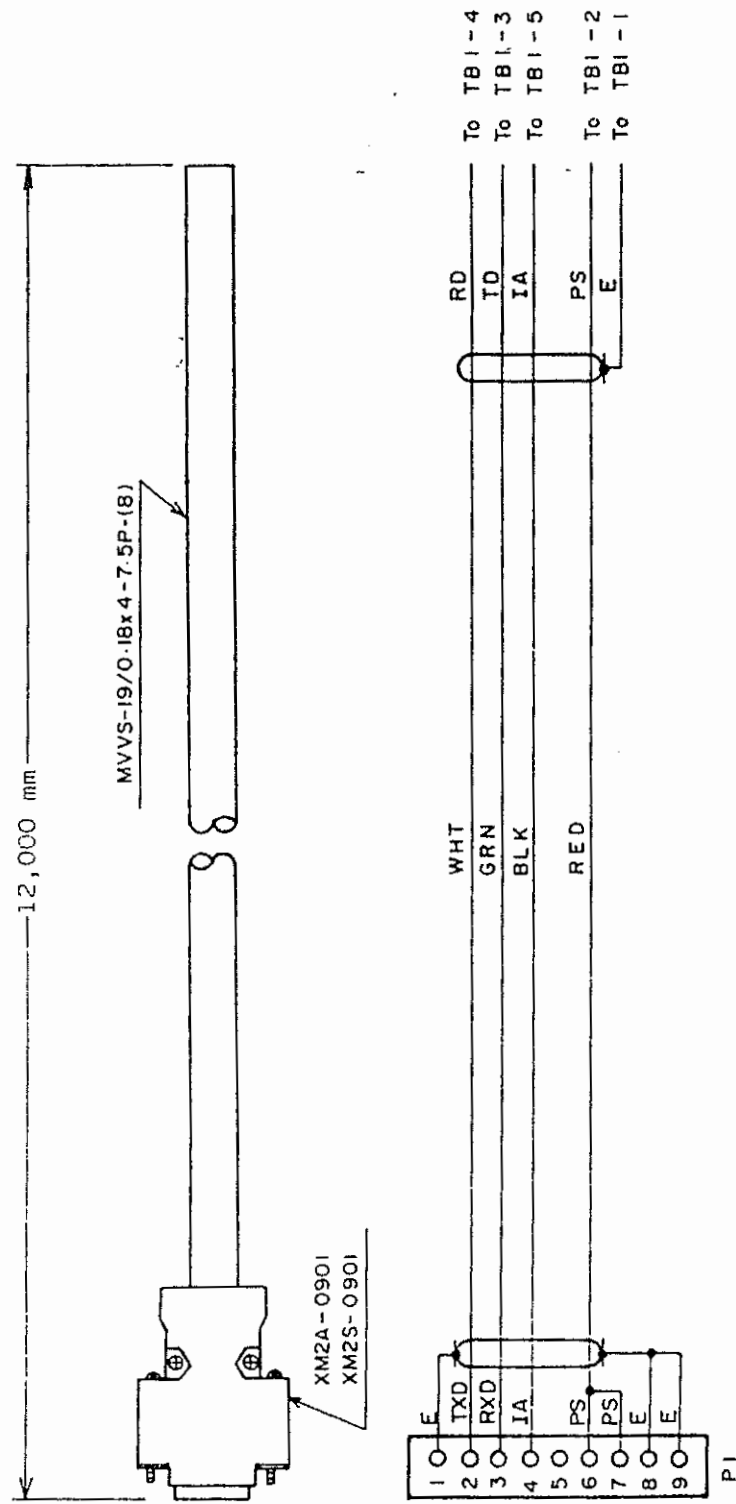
Control Cable (CFQ-2858-012) Assembly Drawing
